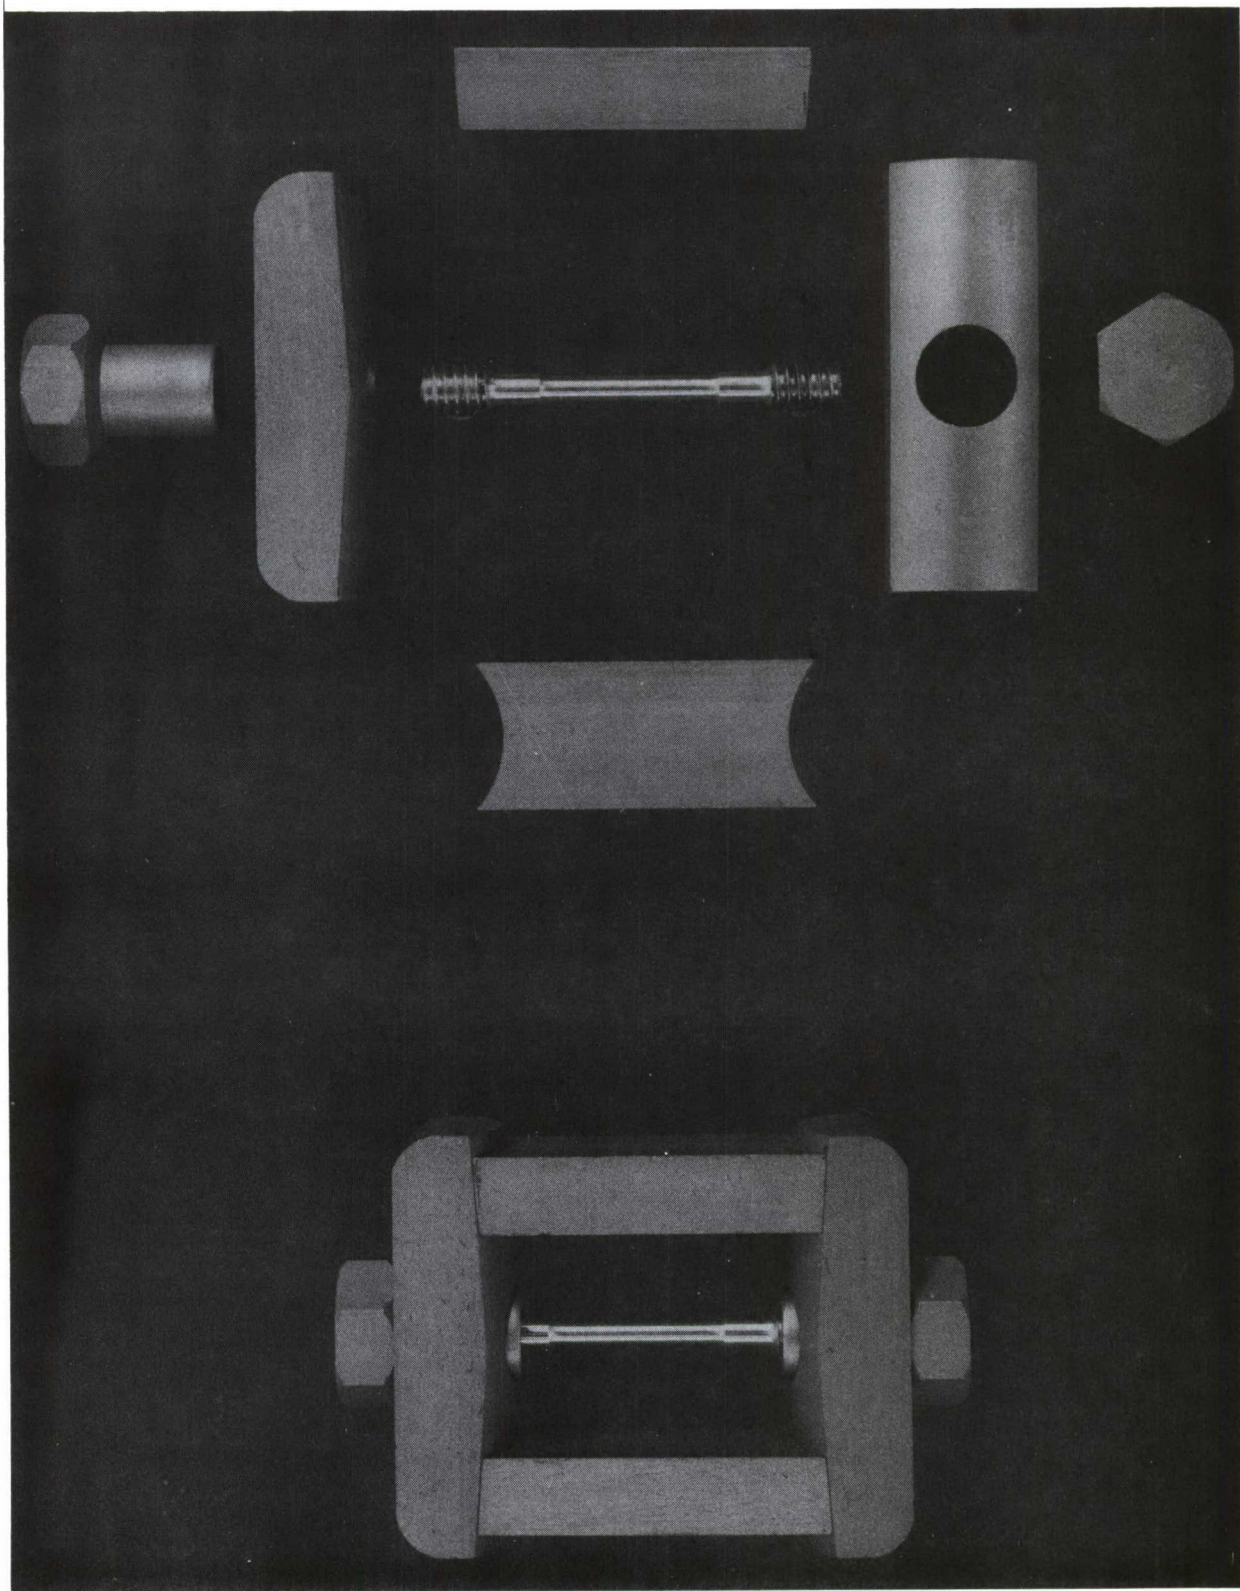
Shows the 1/8-in. Diameter Tensile Specimen, the Various Parts of the Stressing Frame and the Final Stressed Assembly
